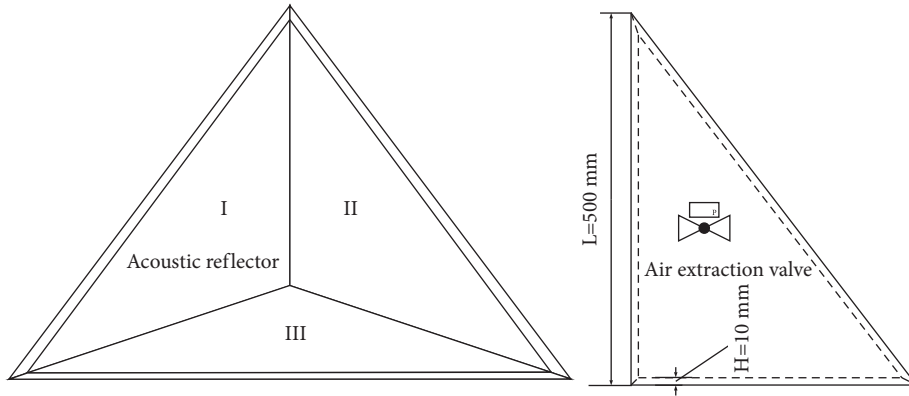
Design drawing of a vacuum cavity corner reflector.
